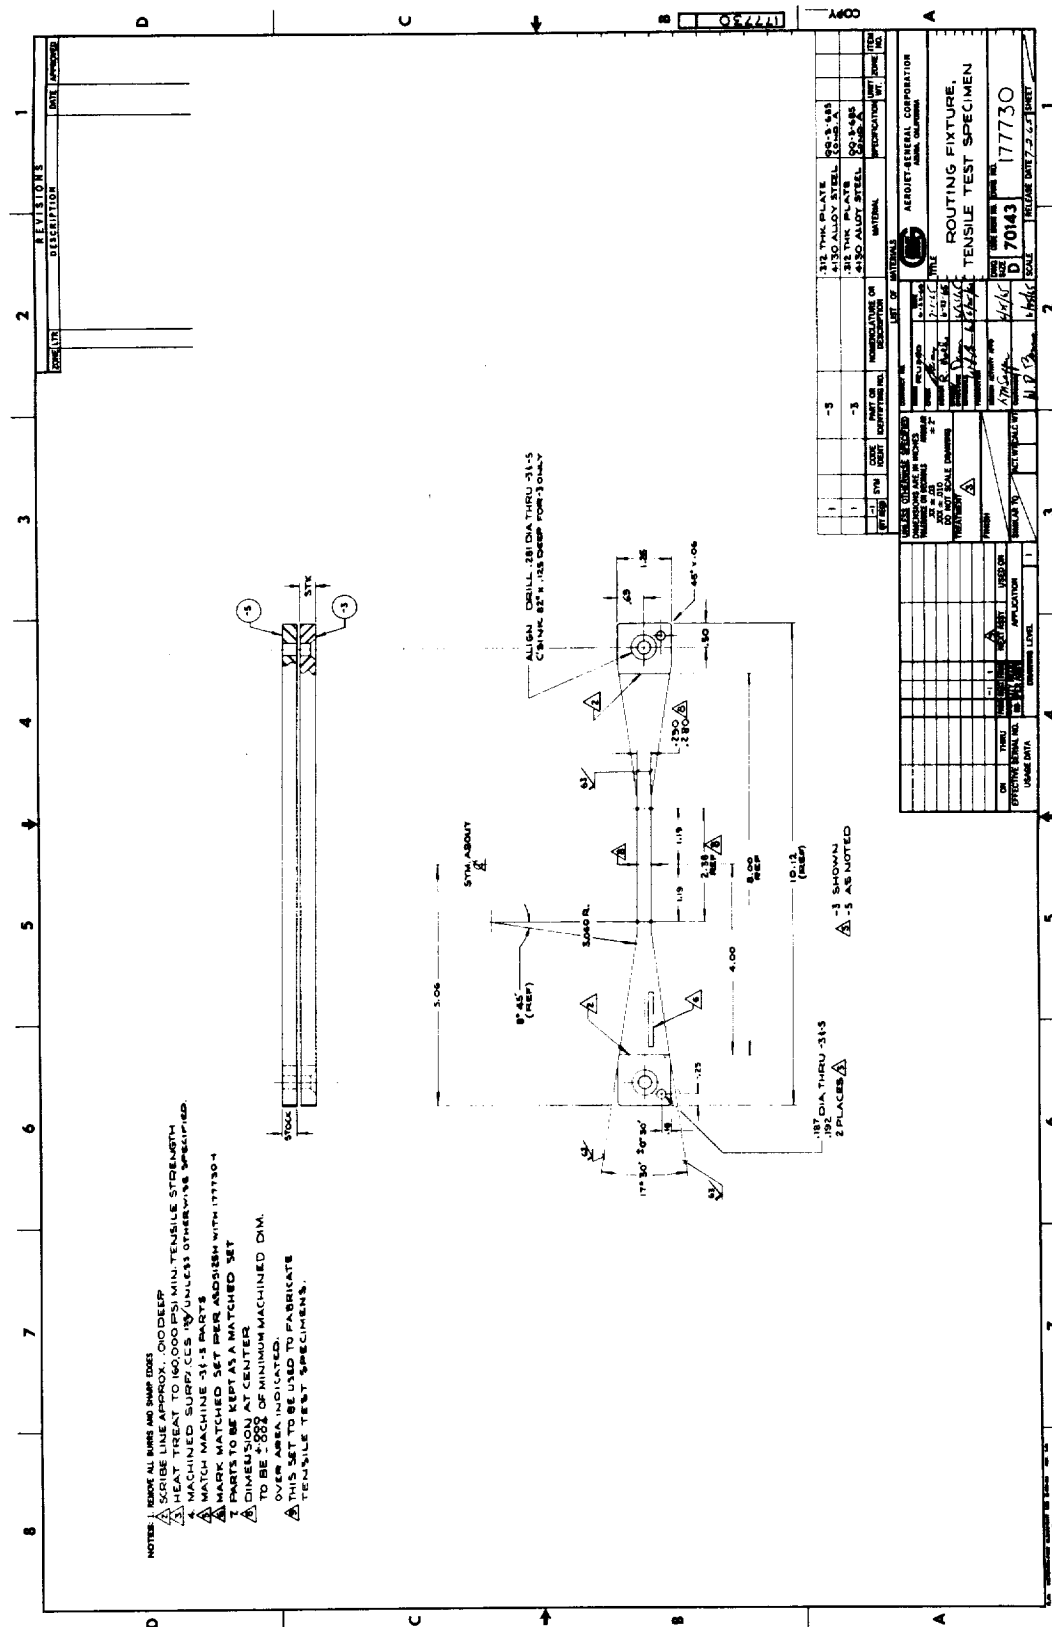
Clamp Fixture, Tensile-Test Specimen
